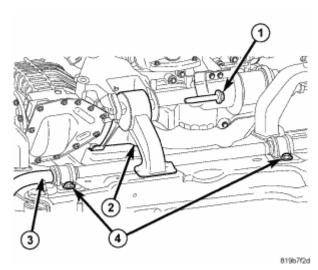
Identifying Rear Torque Mount Courtesy of CHRYSLER LLC
